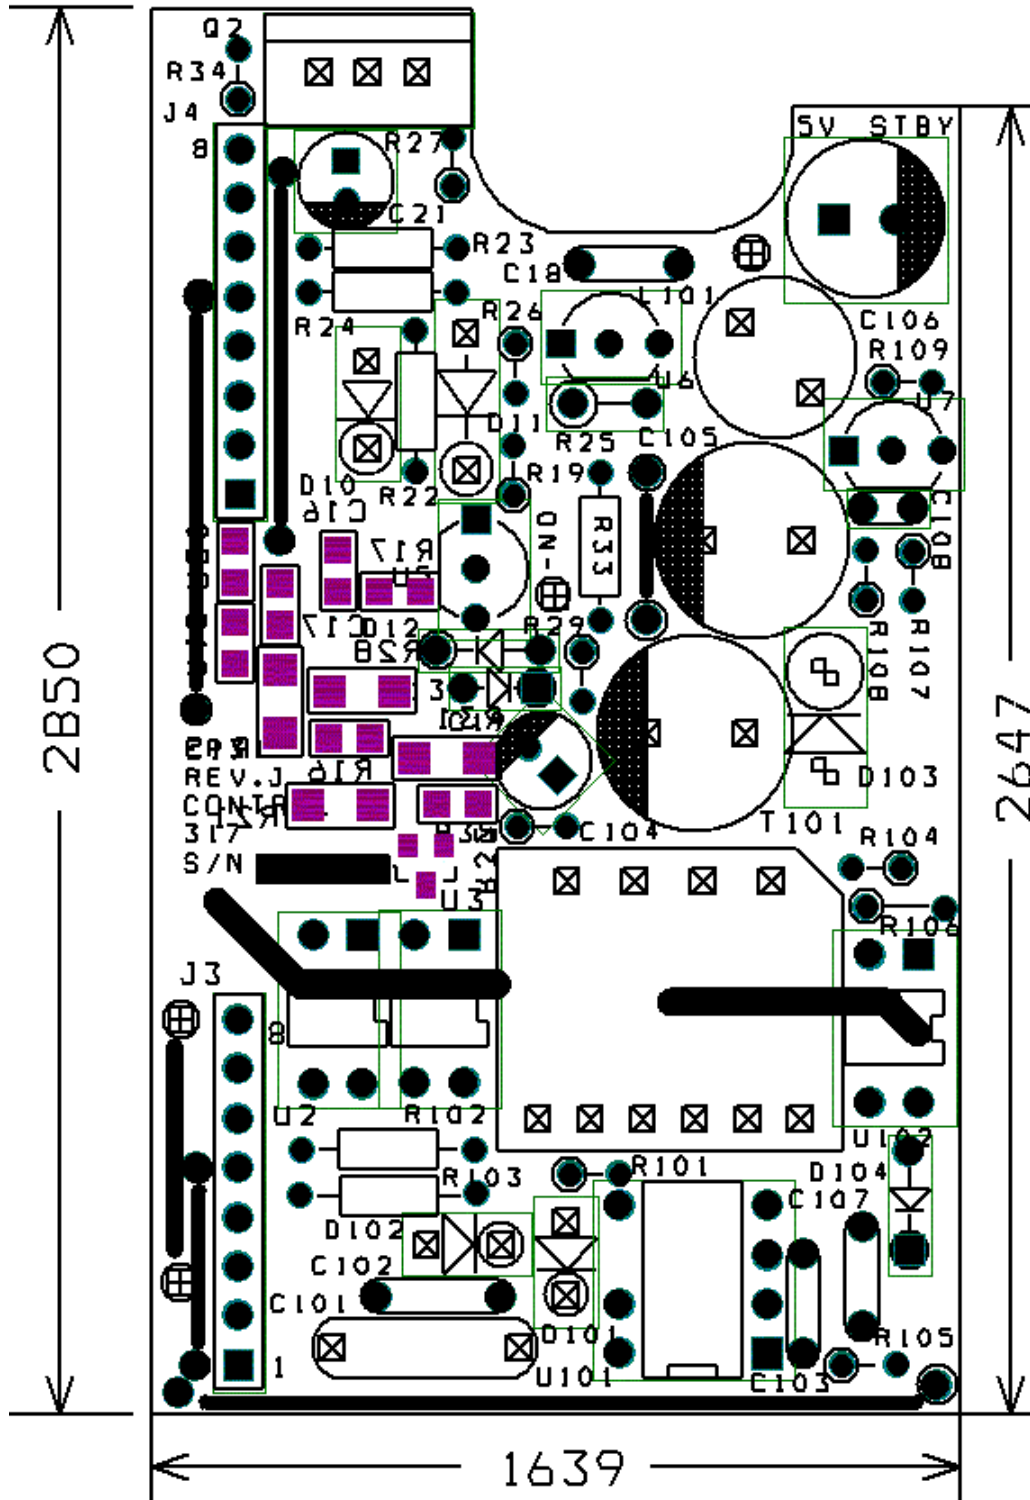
Control Board PCB Silk Screen Artwork (shows component locations).
